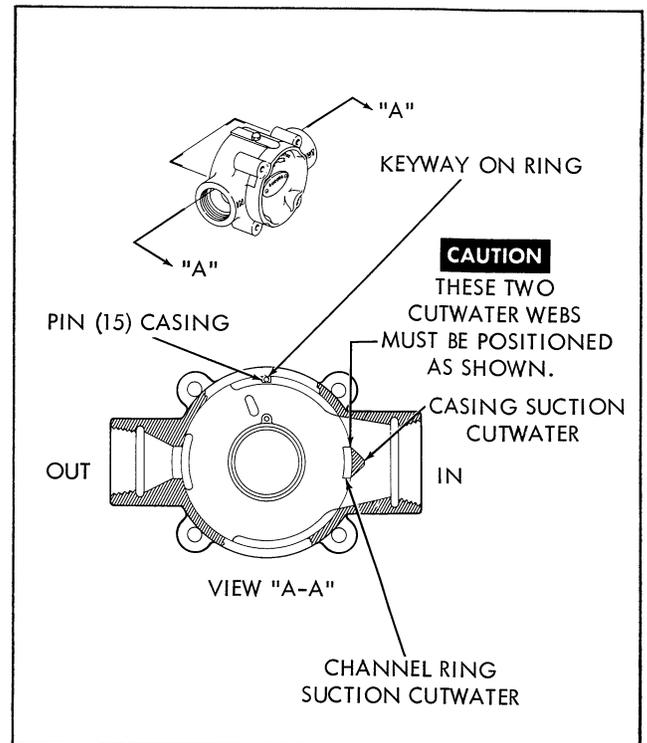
Model 134-135 Installing Inner and Outer Rings in Casing
